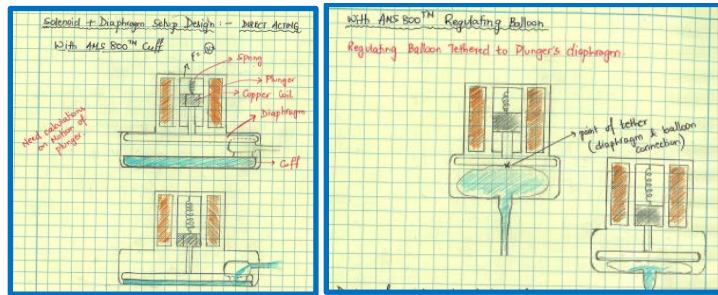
Pump using a solenoid actuating valve and AMS 800™ components.
